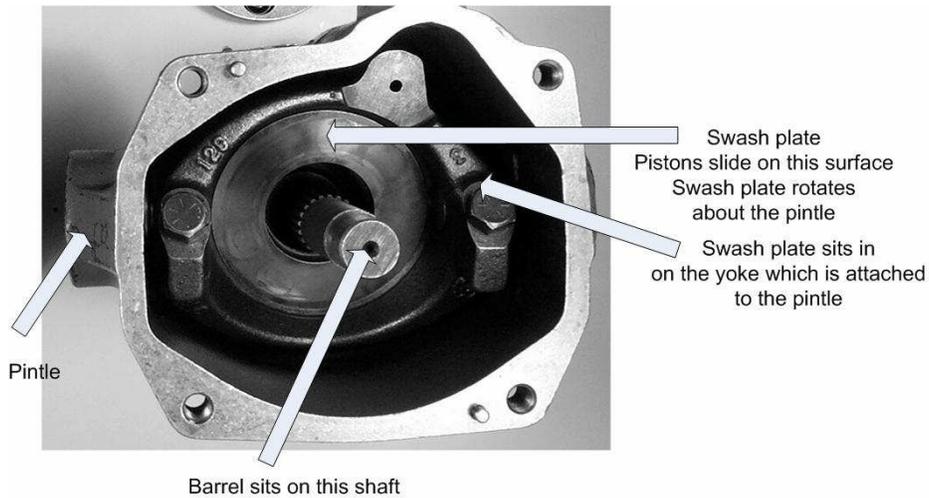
End assembly showing swash plate, yoke and pintle.
